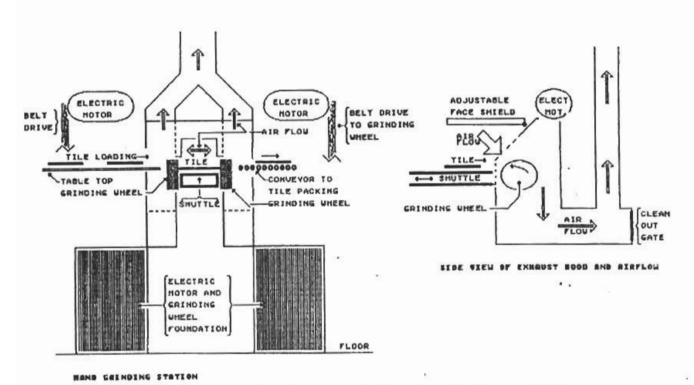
Hand and Corner Grinder Local Exhaust Hoods
